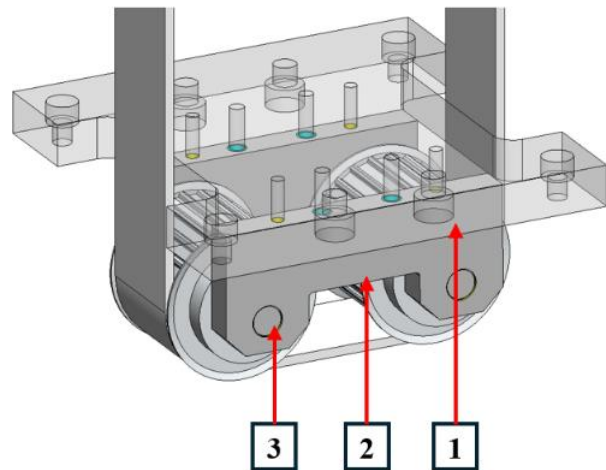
CAD model of lower part of Z axis where 1 – base plate (semi-transparent); 2 – adapters; 3 – shaft
